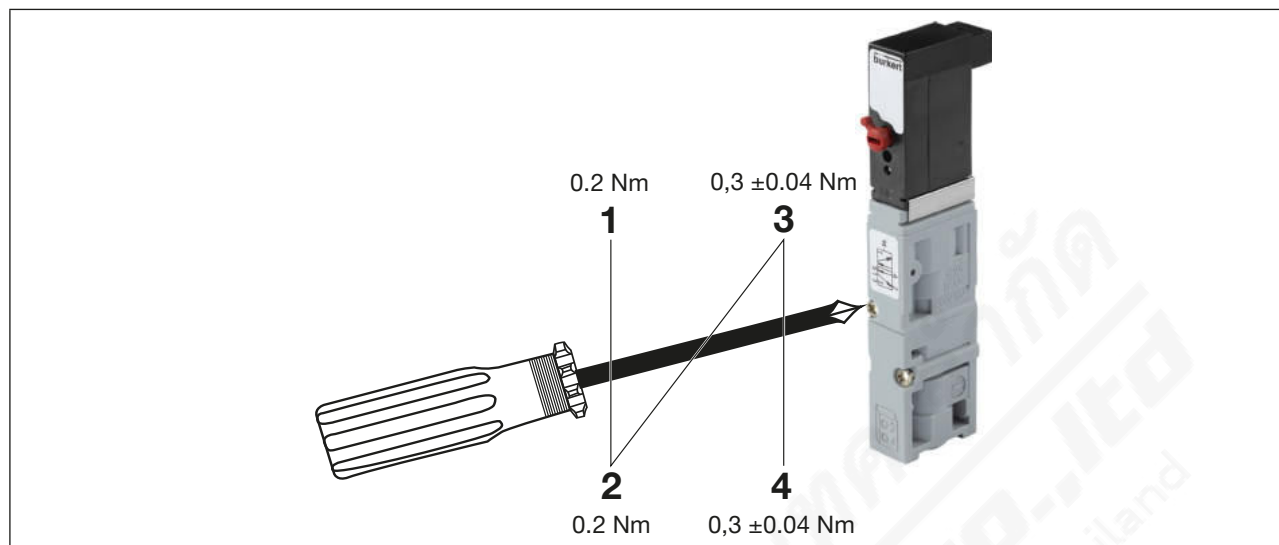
Tightening the screws when replacing valve types 6524 and 6525
